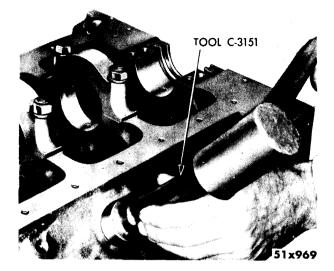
Installing Cylinder Block Core Hole Plugs (Typical)
